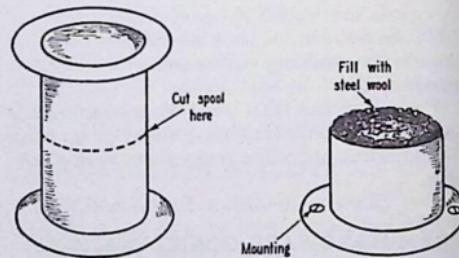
A neat soldering-iron cleaner made from an old solder spool.
